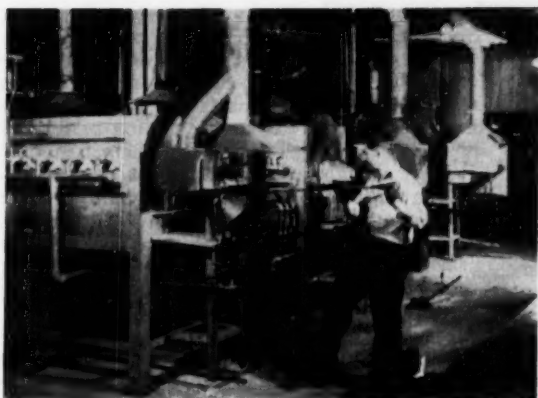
Entrance end of sintering furnaces showing operator about to push a tray full of parts into entrance zone
